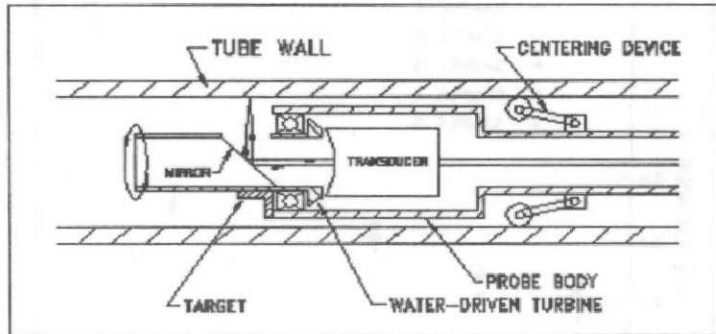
(a): Cross sectional view of inspection head of IRIS
